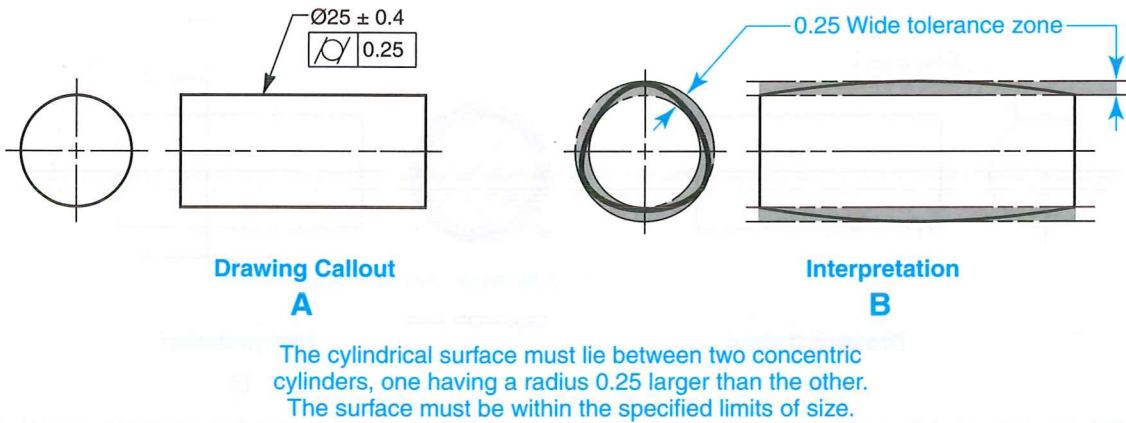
Cylindricity indicates how closely all elements of a revolved surface are to being equidistant from a common axis. A—A feature control frame containing the cylindricity symbol indicates the tolerance. B—The interpretation of the tolerance for the given example. (American Society of Mechanical Engineers)
